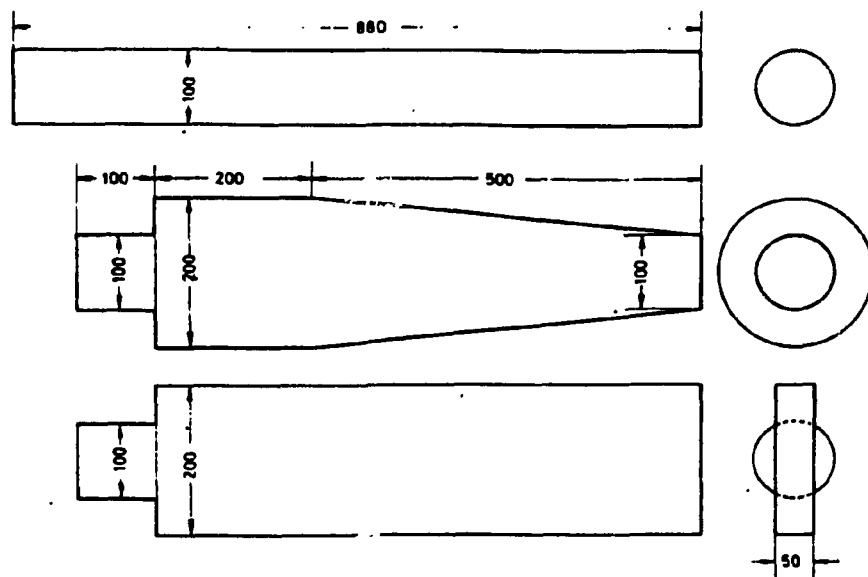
Dimensions of rectangular, tapered and cylindrical beam holes
